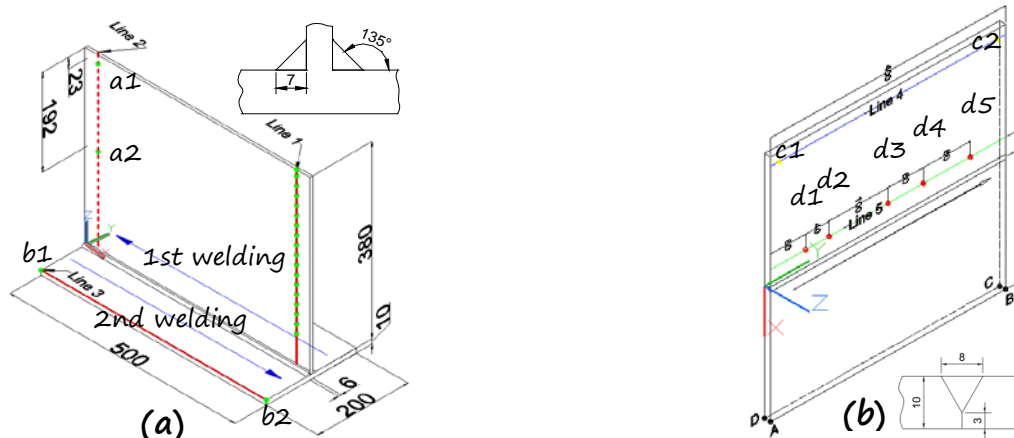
Geometric model and measuring points of (a) T-Beam (b) butt welding plate
